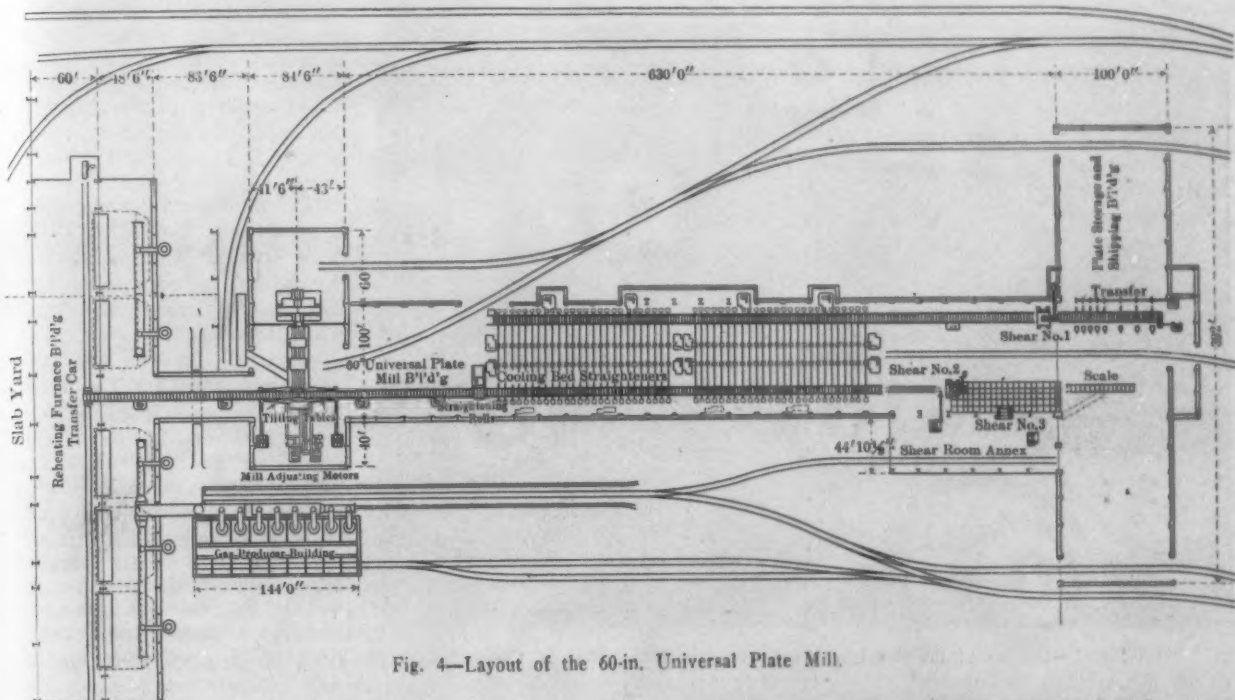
Layout of the 60-in. Universal Plate Mill.
